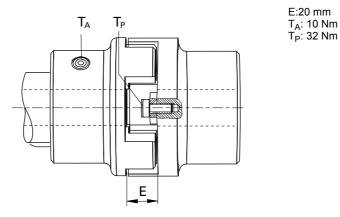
Assembling the crown gear coupling at pump with standard coupling
